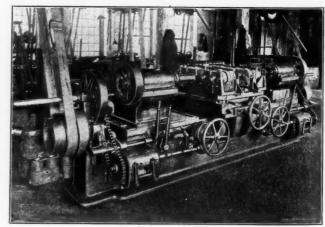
Four-cylinder Boring Machine with Revolving Table
